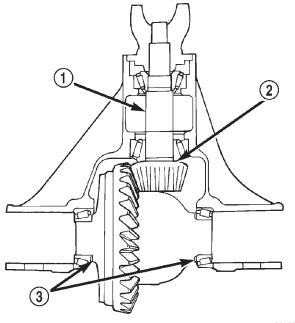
Pinion Gear Depth Measurement—Typical 1 – ARBOR
